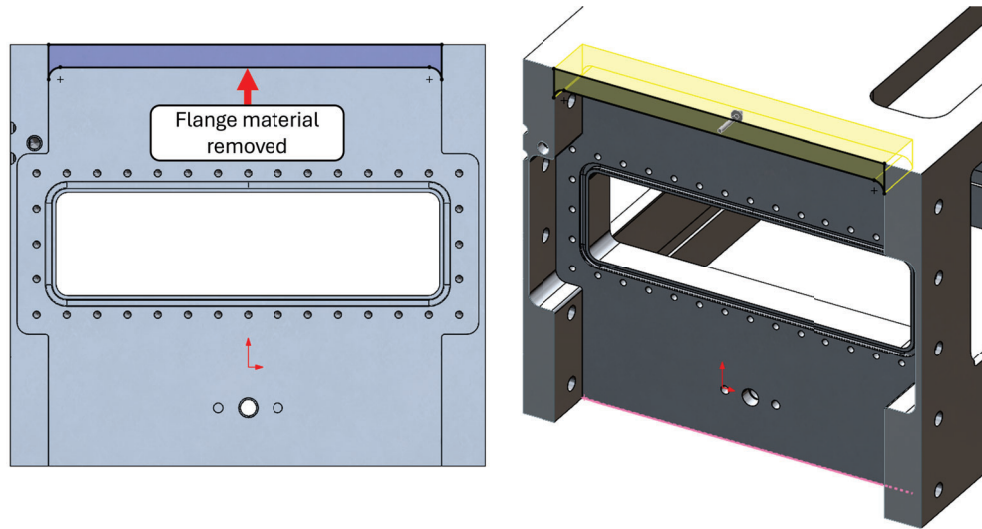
The top flange on the cooling chamber is machined away to provide access to the bolts used to attach the recycle ductwork to the cooling chamber.
